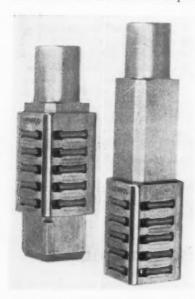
ANTIFRICTION SQUARE GUIDE-PIN ROLLER-BEARING ASSEMBLY
